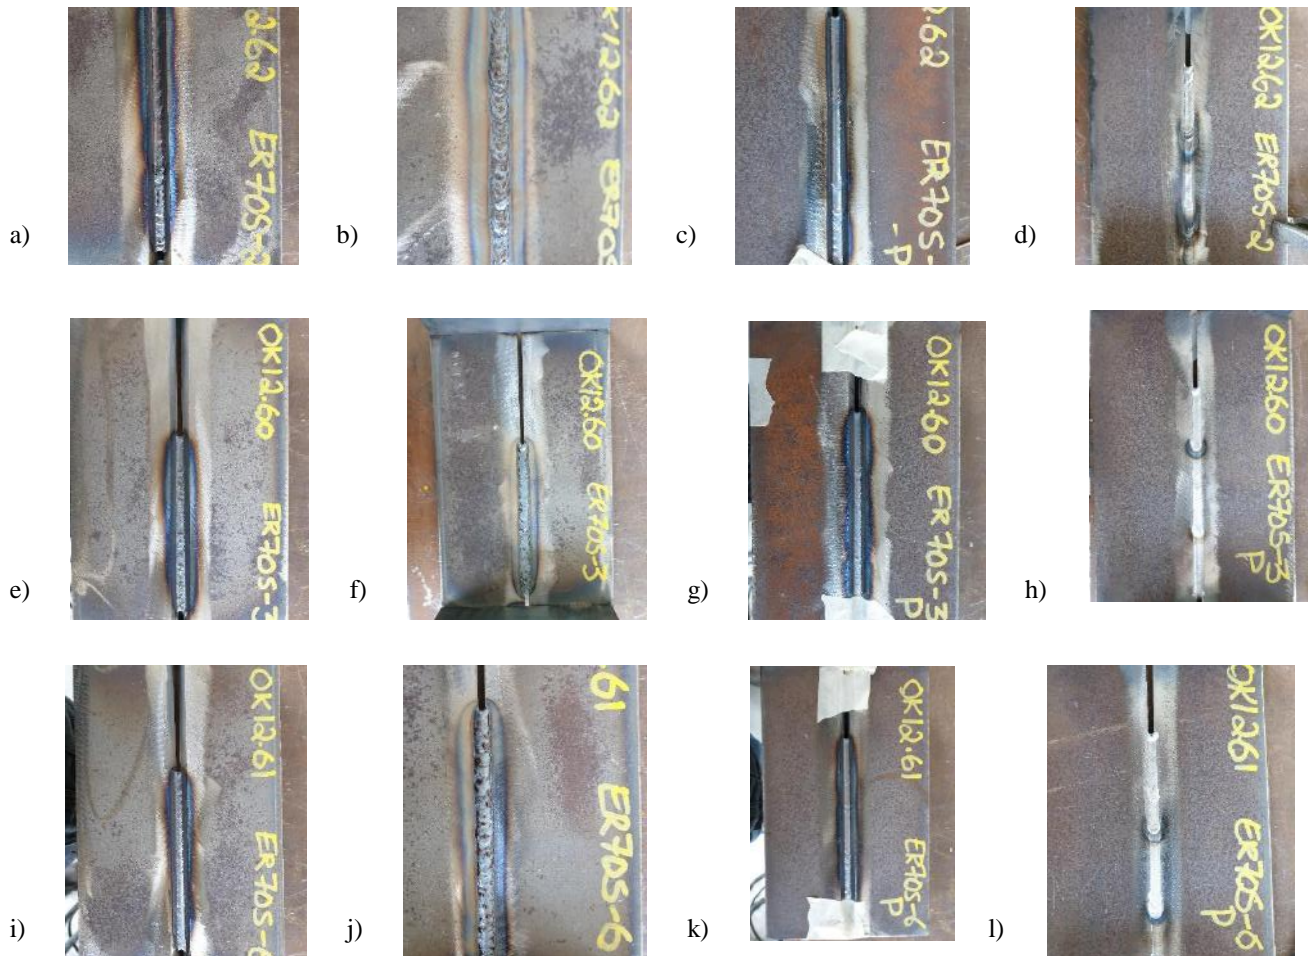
Groove test coupons welded with and without purging gas:
